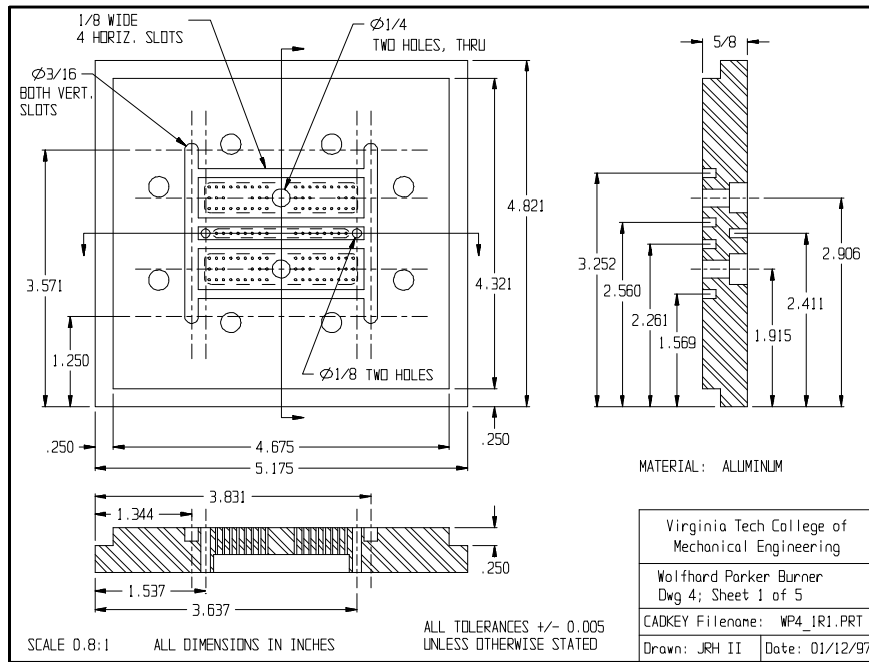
Burner Mounting Base, Drawing 4 Sheet 1 of 5
